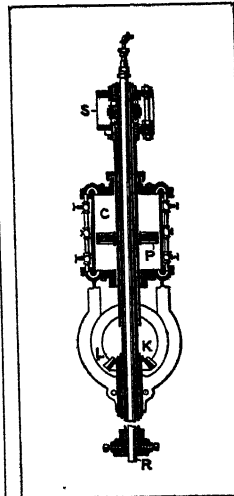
SINGLE-CYLINDER HYDRAULIC FEED FOR DIAMOND DRILL
